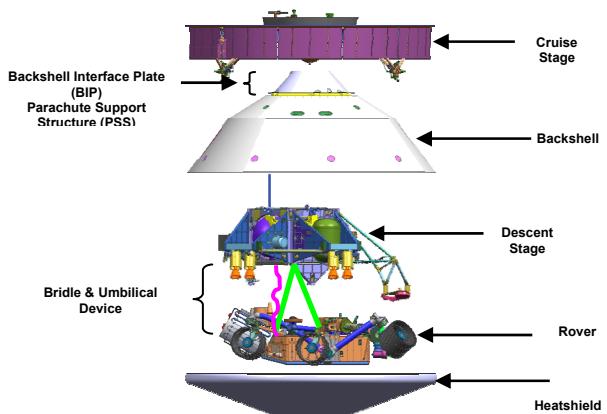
MSL Design Concept – Major Assemblies, Exploded View
